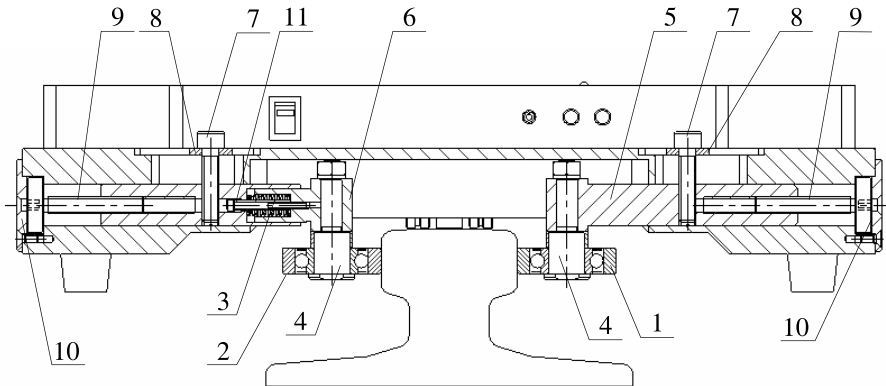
A cross-section of the platform: 1 – guiding roller, 2 – pressure roller, 3 – spring, 4 – roller axis, 5 – idler guiding roller bracket, 6 – pressure roller bracket, 7 – blocking screw, 8 – board with a scale, 9 – adjusting screw, 10 – cover, and 11 – limiting screw
